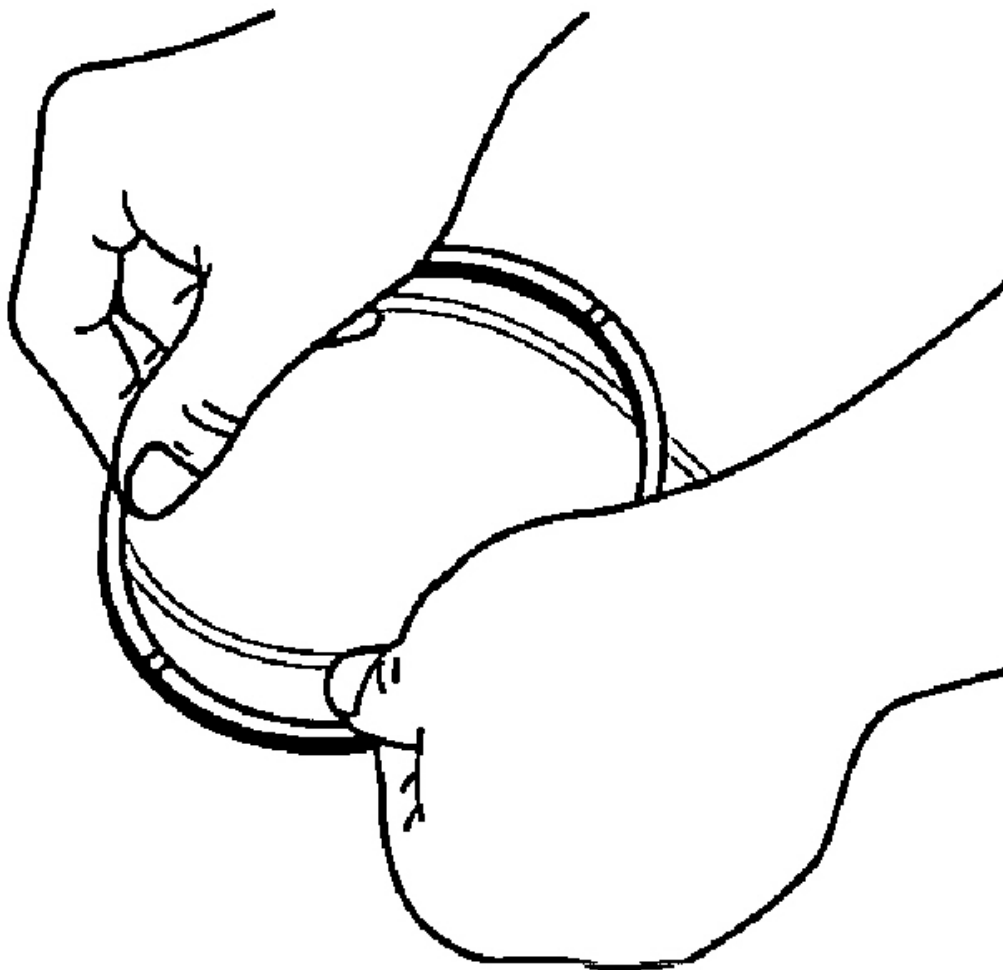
Identifying Oil Seal Spring Rotation Lock
